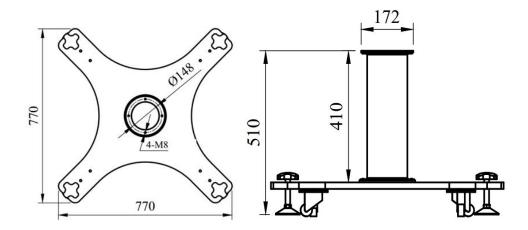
Mechanical dimensions of the manipulator base structure (left: plan view; right: front view)
